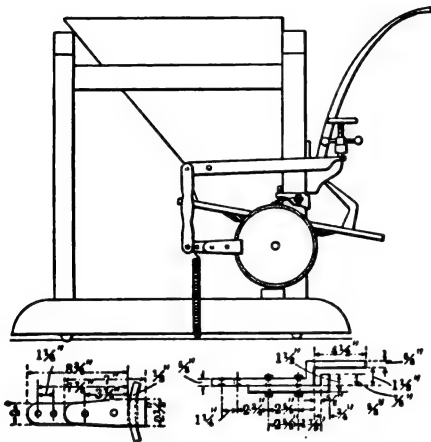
ROTATING MECHANISM FOR A CHALLENGE FEEDER.
